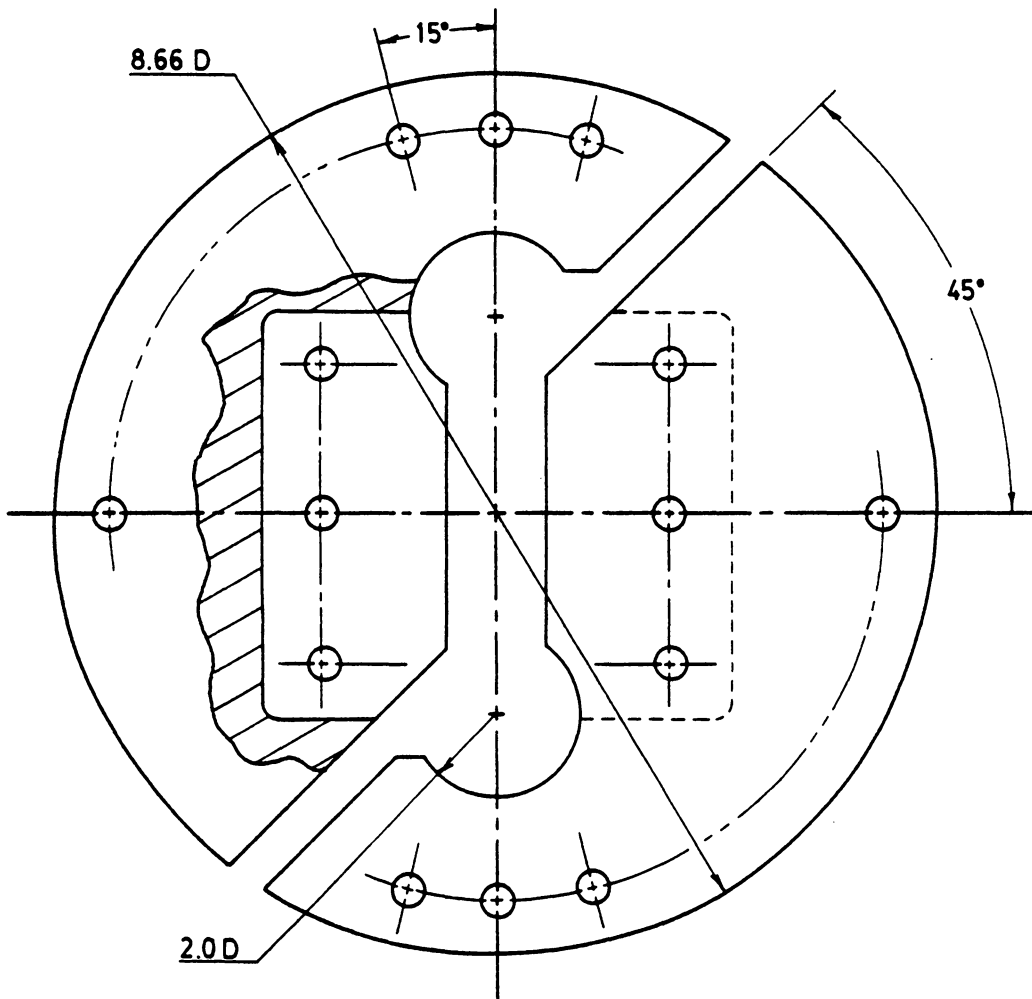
Front view of the load fixture used to grip Arcan specimen during testing.
